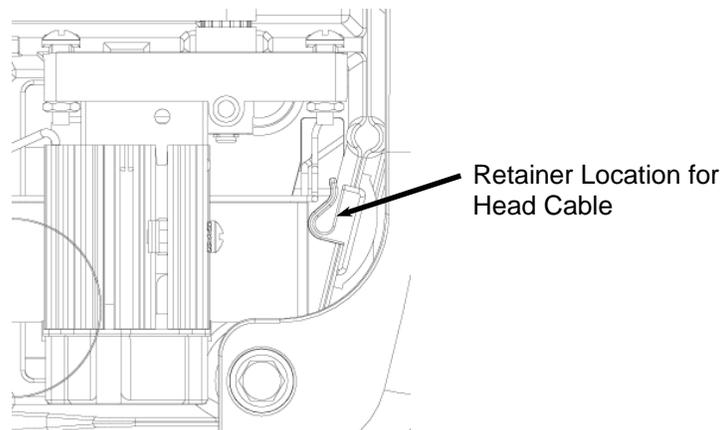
ROUTING THE HEAD CABLE HARNESS
